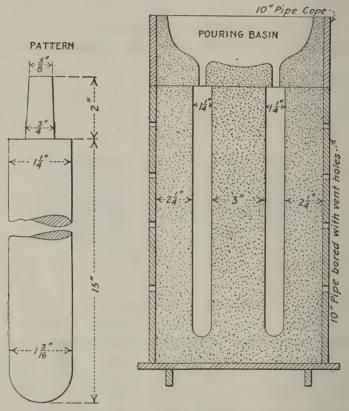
Details of Pattern and Mold Required for Arbitration Bars in Testing Gray-Iron Casting Material
